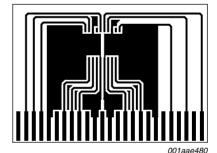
PCB used for thermal tests; heat sink area 400 mm²
